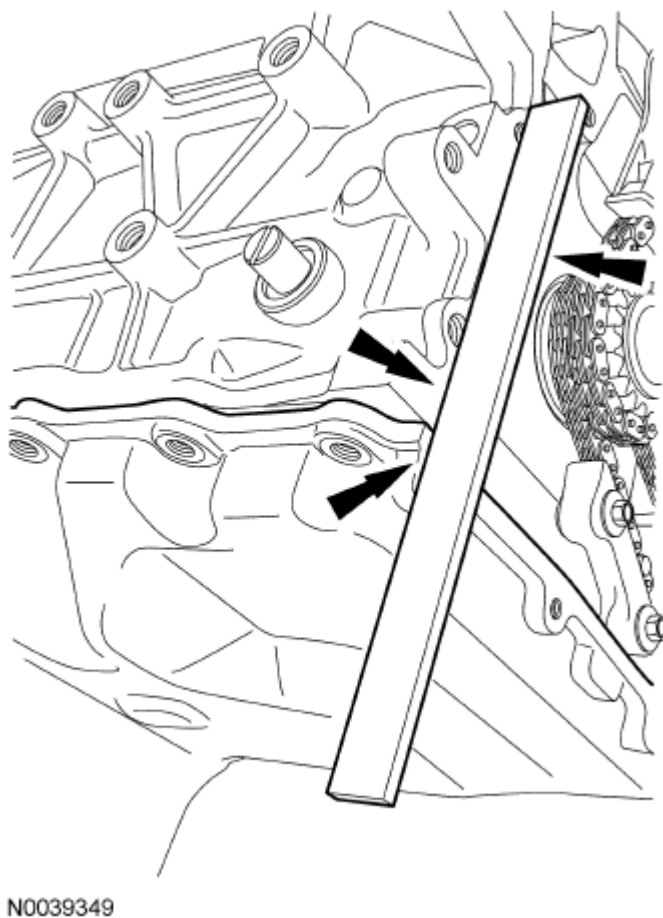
Aligning Front Surface Of Oil Pan Flush With Front Surface Of Engine Block
